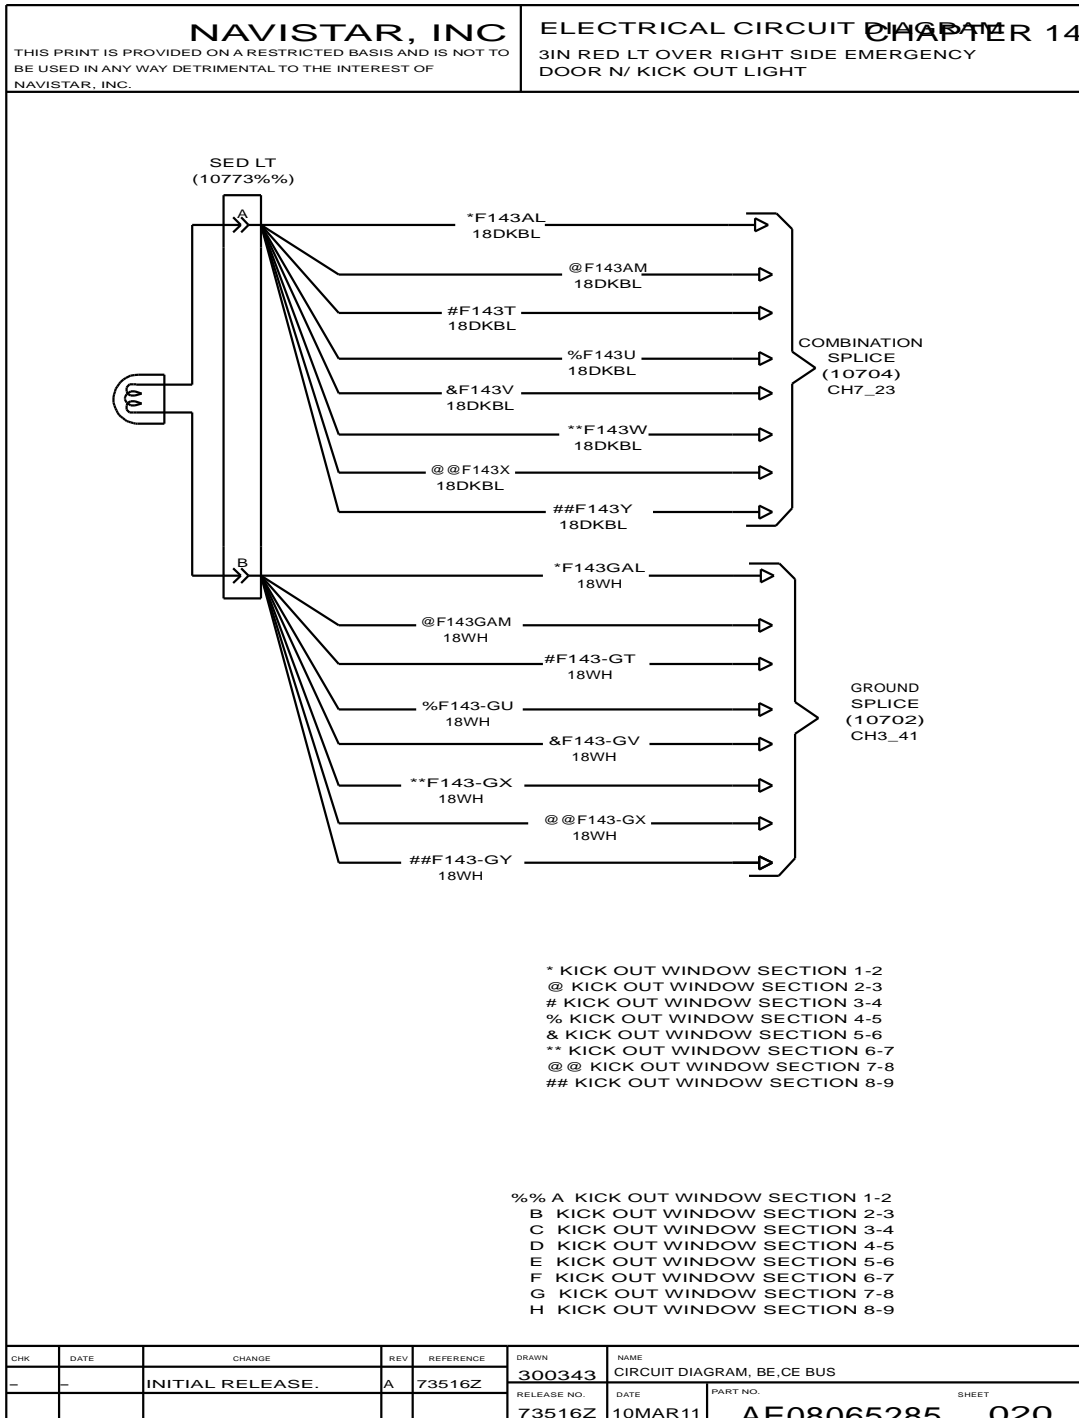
3 Inch Red Light Over Right Side Emergency Door without Kick Out Light
